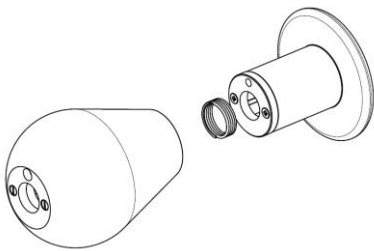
Pull the two actuator parts slowly apart. Don't lose the spring between the two parts!
